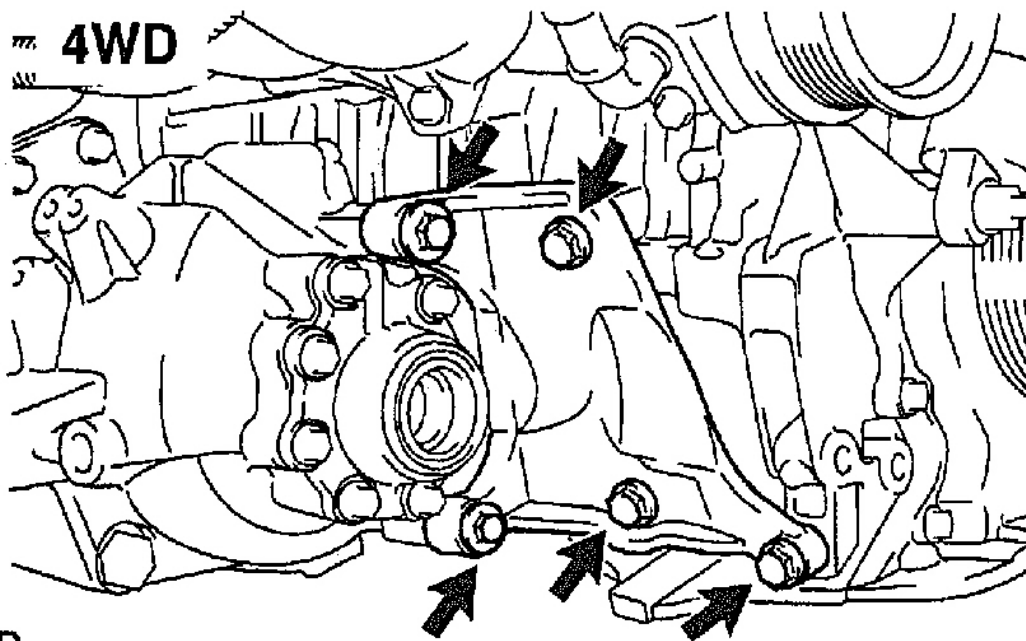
Removing Bolt Holding Rear Engine Mounting Bracket
